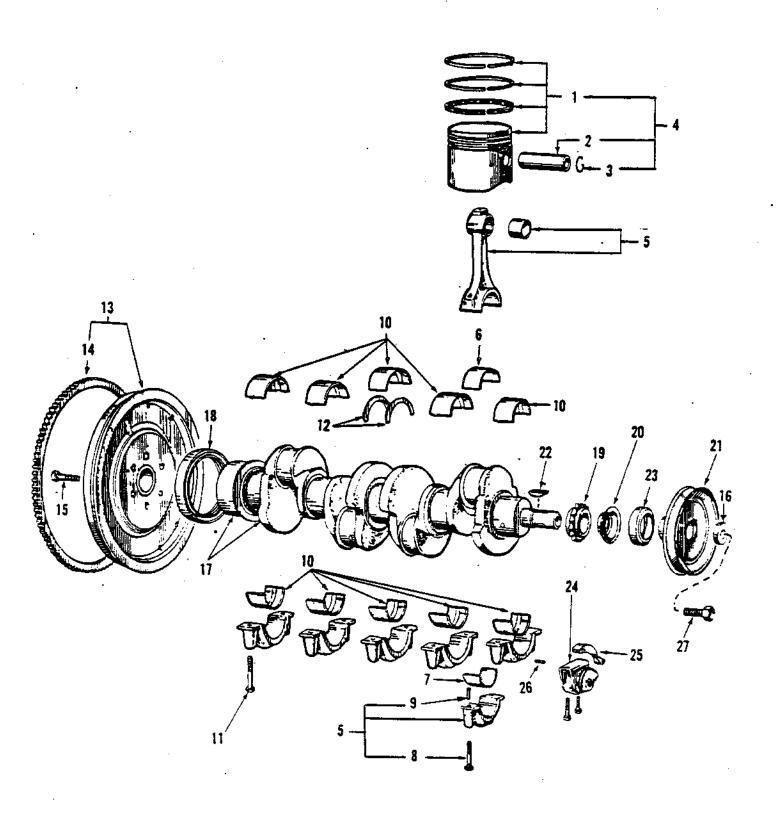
CRANKSHAFT, FLYWHEEL, PISTONS AND RELATED PARTS
